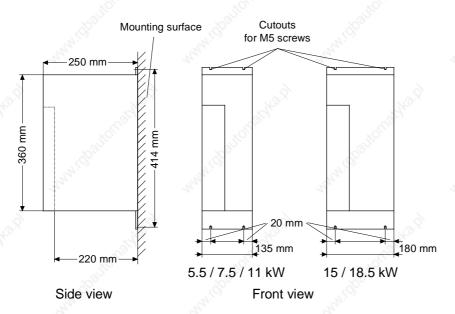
Dimension drawings for housings 135 mm and 180 mm wide
